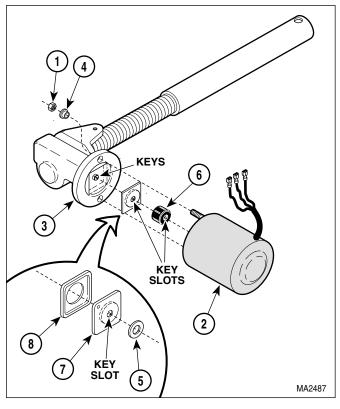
Actuator Motor / Actuator Brake Removal / Installation
